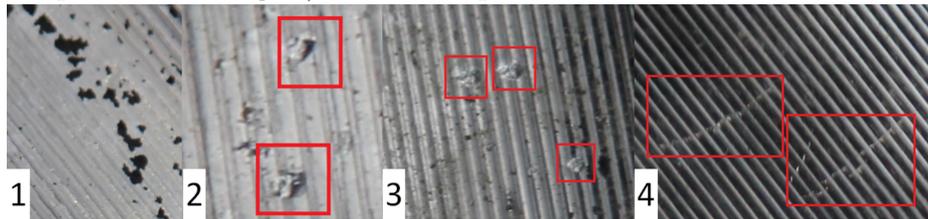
Examples of surface defects after machining (spalling-1, tear-2, build-up-3, crack-4).
